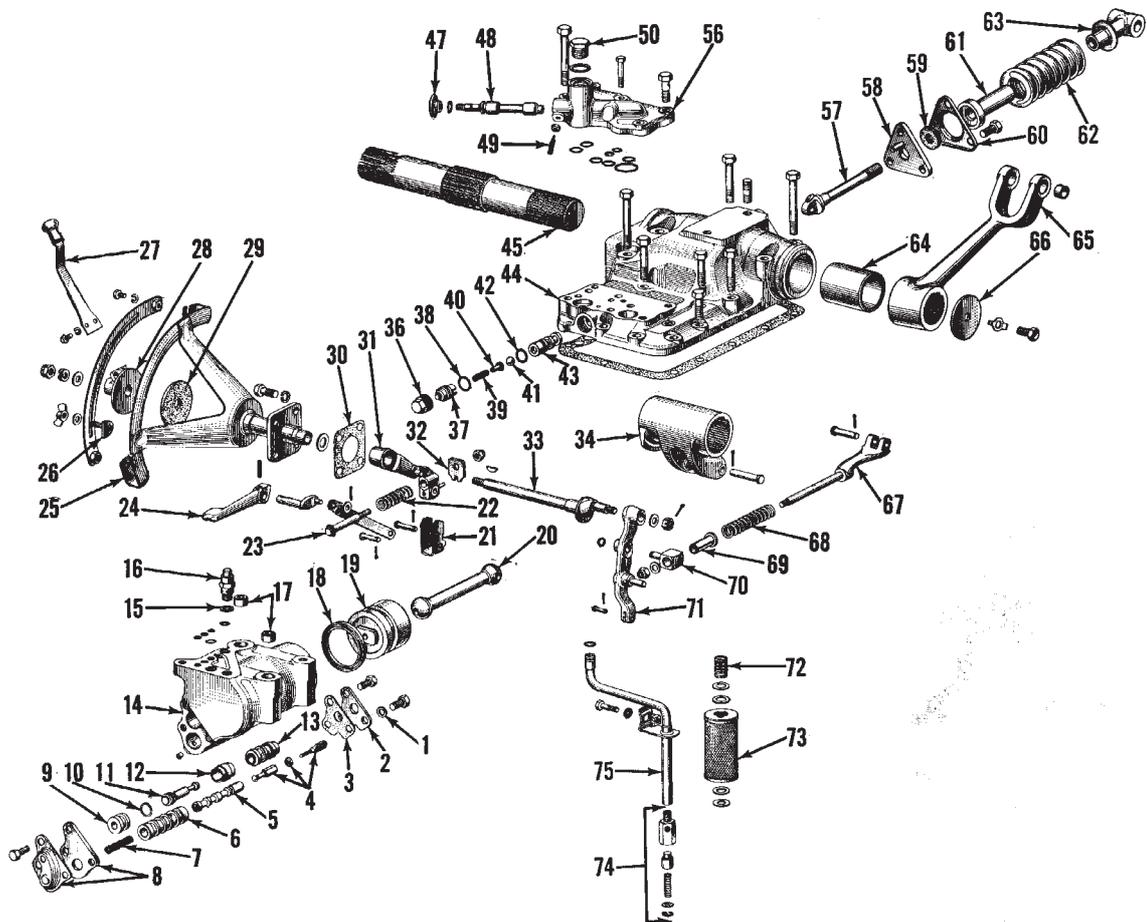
Exploded view of early Fordson Dexta hydraulic lift cover, cylinder and linkage. Accessory plate (56) can be replaced with flow control valve (54—Fig. FO564) if complete valve and linkage are used. Although component parts are different, complete lift cylinder assembly (14) is interchangeable with later type complete lift cylinder assembly (14A — Fig. FO564).
